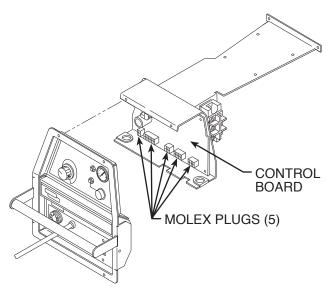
CASE FRONT SCREW REMOVAL
